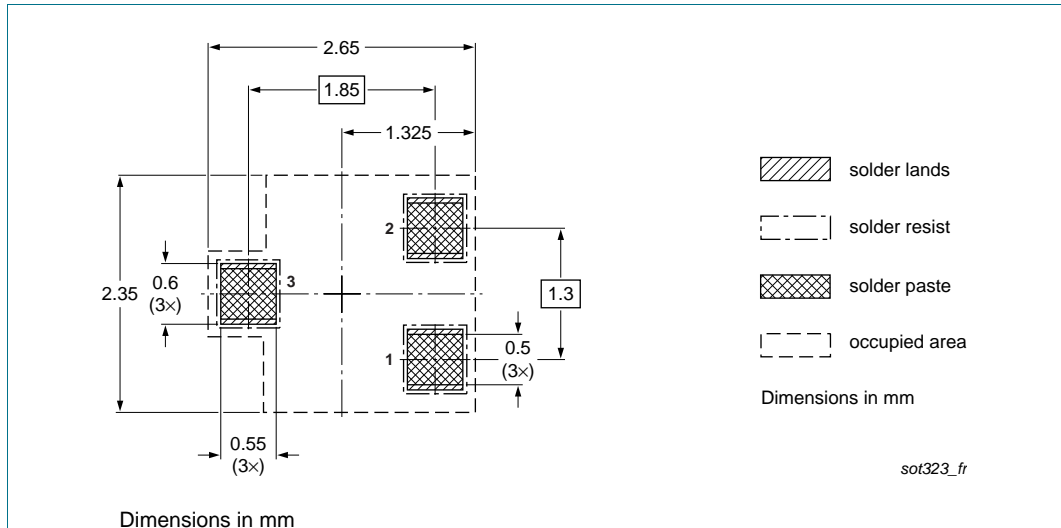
Reflow soldering footprint PDTB1xxxU series (SOT323/SC-70)
